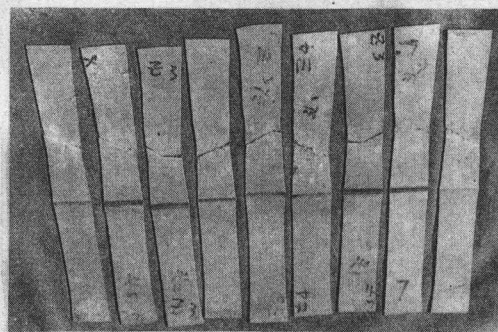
Specimens of welded galvanized steel sheet after tensile test
